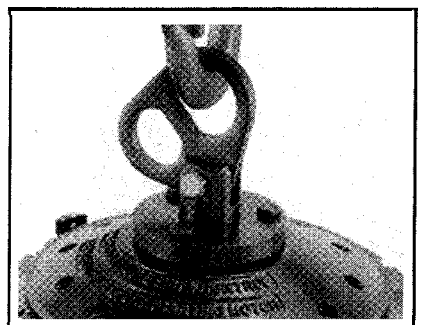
Use a suitable lifting fixture (like the Evinrude/Johnson one pictured here) to lift the powerhead
